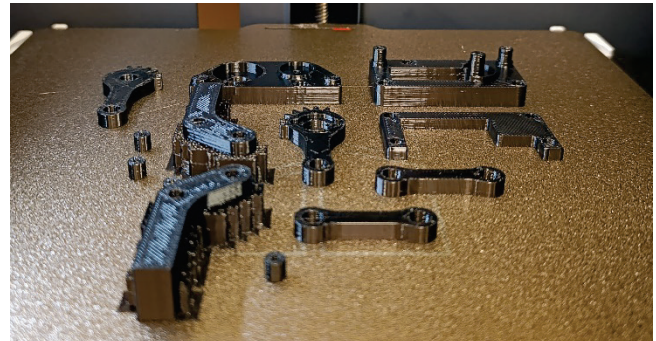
3D-printed gripper parts made from PETG material using the Bambu Lab P1S printer
